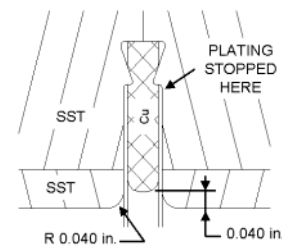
Cross-section of the outer conductor RF joint with modified vacuum flanges and gasket
